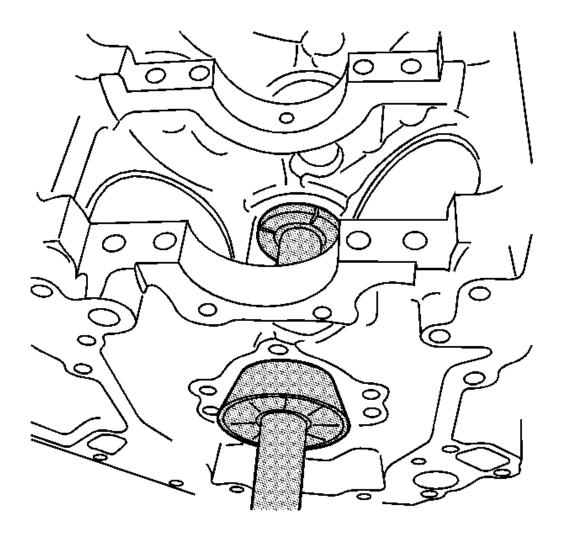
View Of J 33049 Camshaft Bearing Tool & Nylon Cone Courtesy of GENERAL MOTORS CORP.
